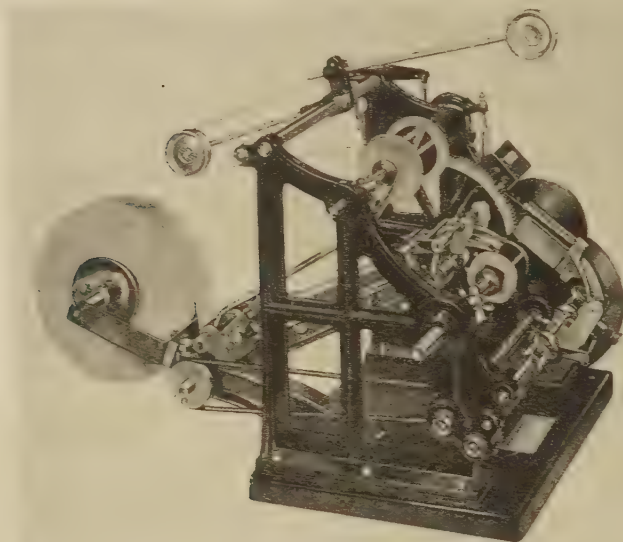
Coil-winding Machine for Paper Insertion between Layers.
